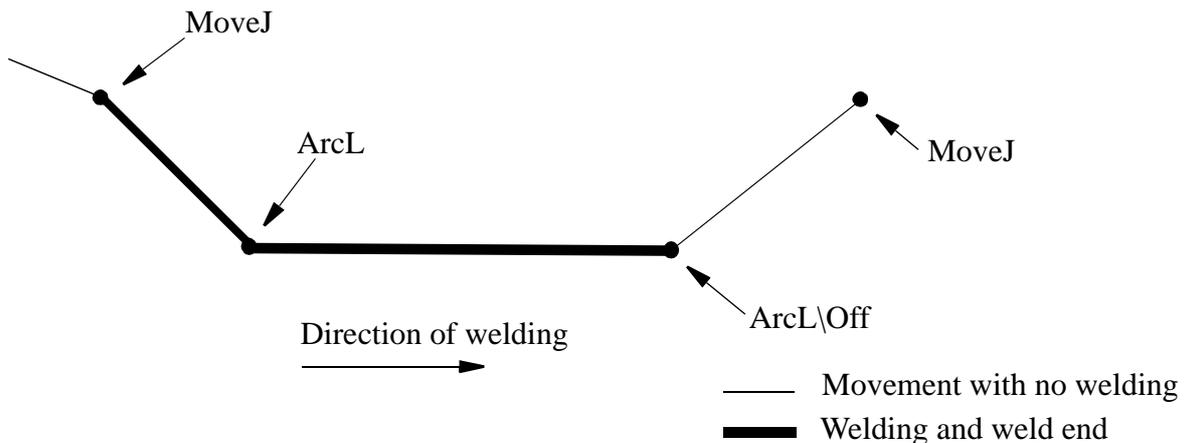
If welding is started without the argument *\On*, the weld is begun at the previous position.
